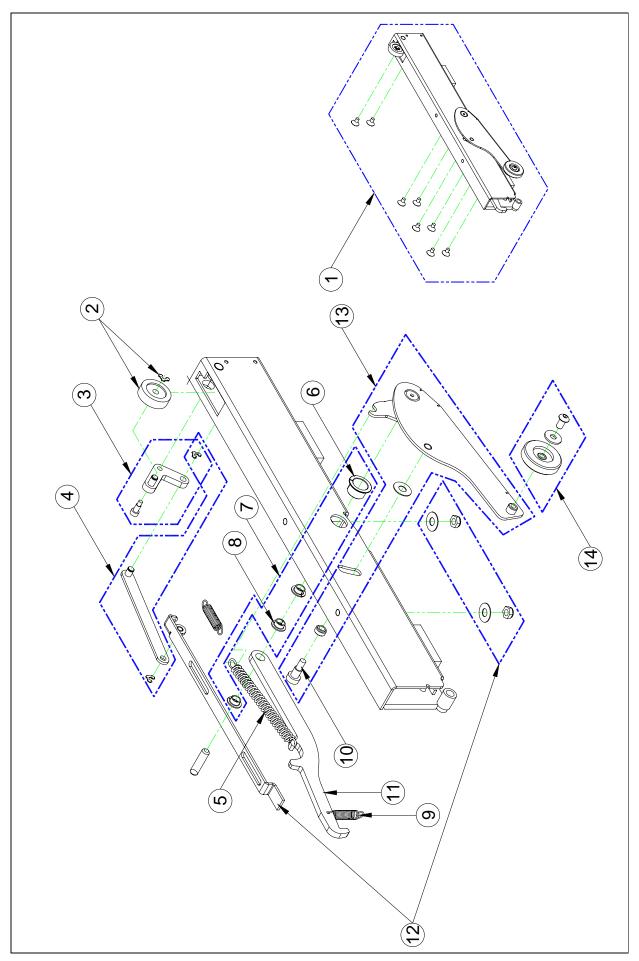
ROLLSTOP LATCH ACTUATOR ASSEMBLY 32DPH02.B
